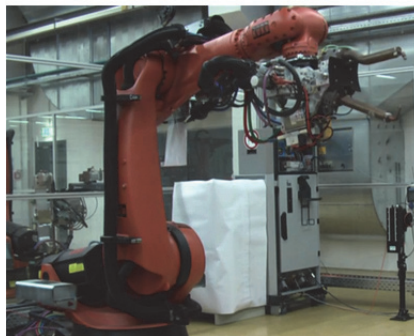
Typical cell for automotive body shell work: Robot for holding and moving of a welding gun and electrical cabinets with robot controller and welding controller.
